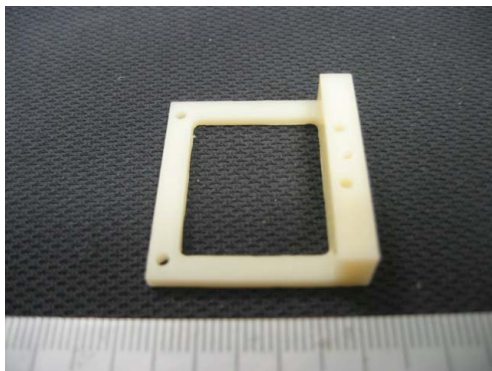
Mechanical holder for small robot at the end of the spring launcher
